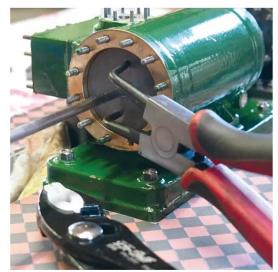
Two blind holes were drilled in the back of the piston to accept the circlip pliers and the piston rod extension used to align the LP rod with the threaded hole in the piston. The soft-jaw pliers were used to grip the rod and the piston screwed on tightly...
